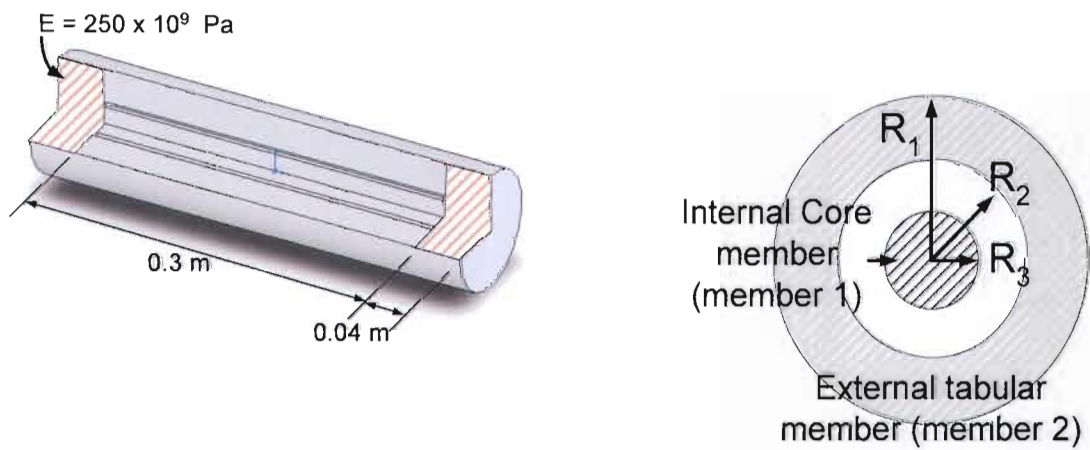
a, 3D view and b , Cross-Section of Component.
